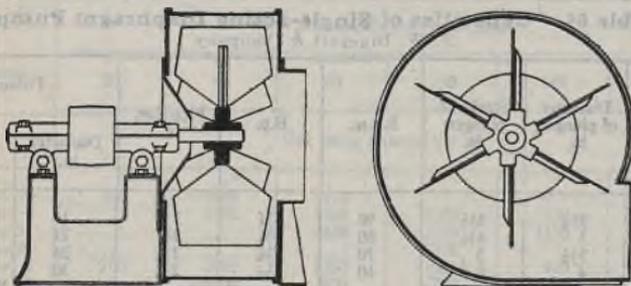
Straight-blade or steel-plate fan used for exhausting and draft.
